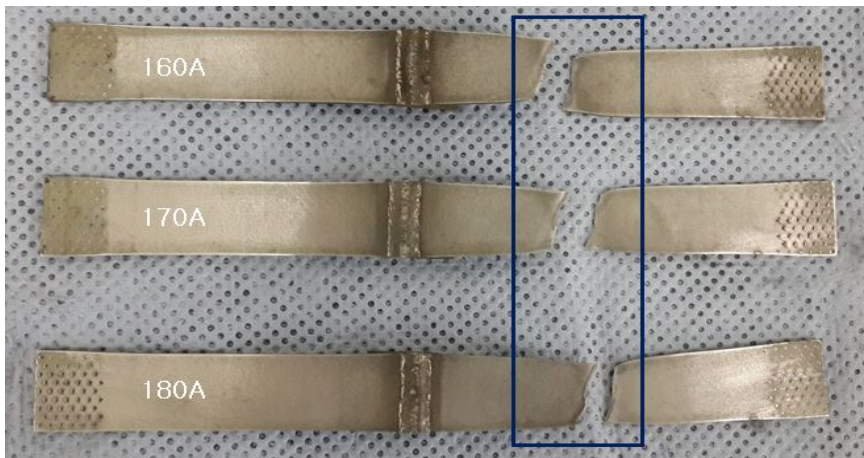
Fractured specimen after tensile-shear test(KC)
